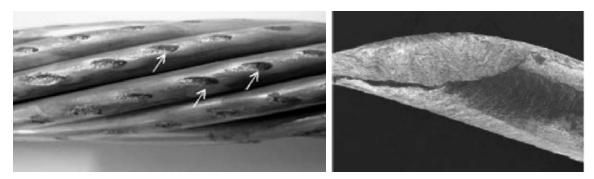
Photographs of fatigue failure of ACSR conductor. (a) Fretting marks on strands near clamp area; (b) failed strand indicating fracture at 45°[12]
